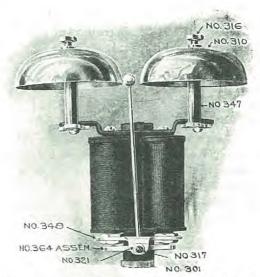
Standard Ringer Showing Code Number of Piece Parts
